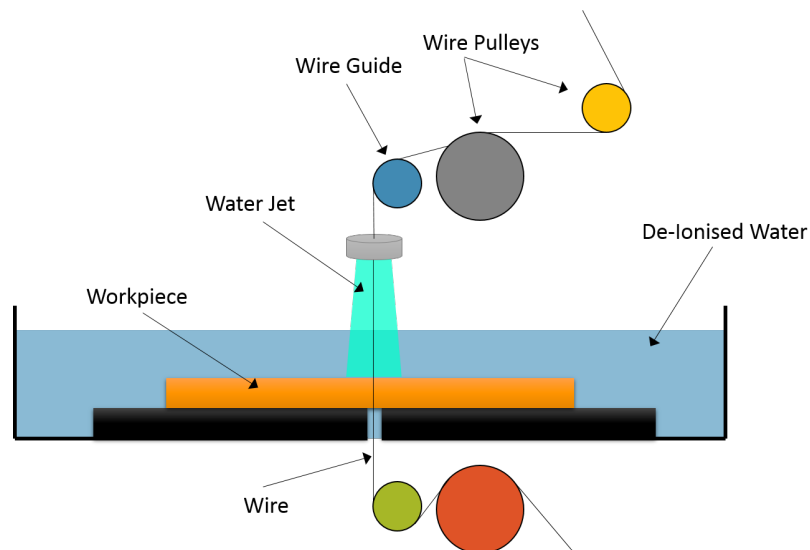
The WEDM Setup. The water jet is used to feed the wire that comes from a roll, through the machine bed and to the rollers at the bottom.
